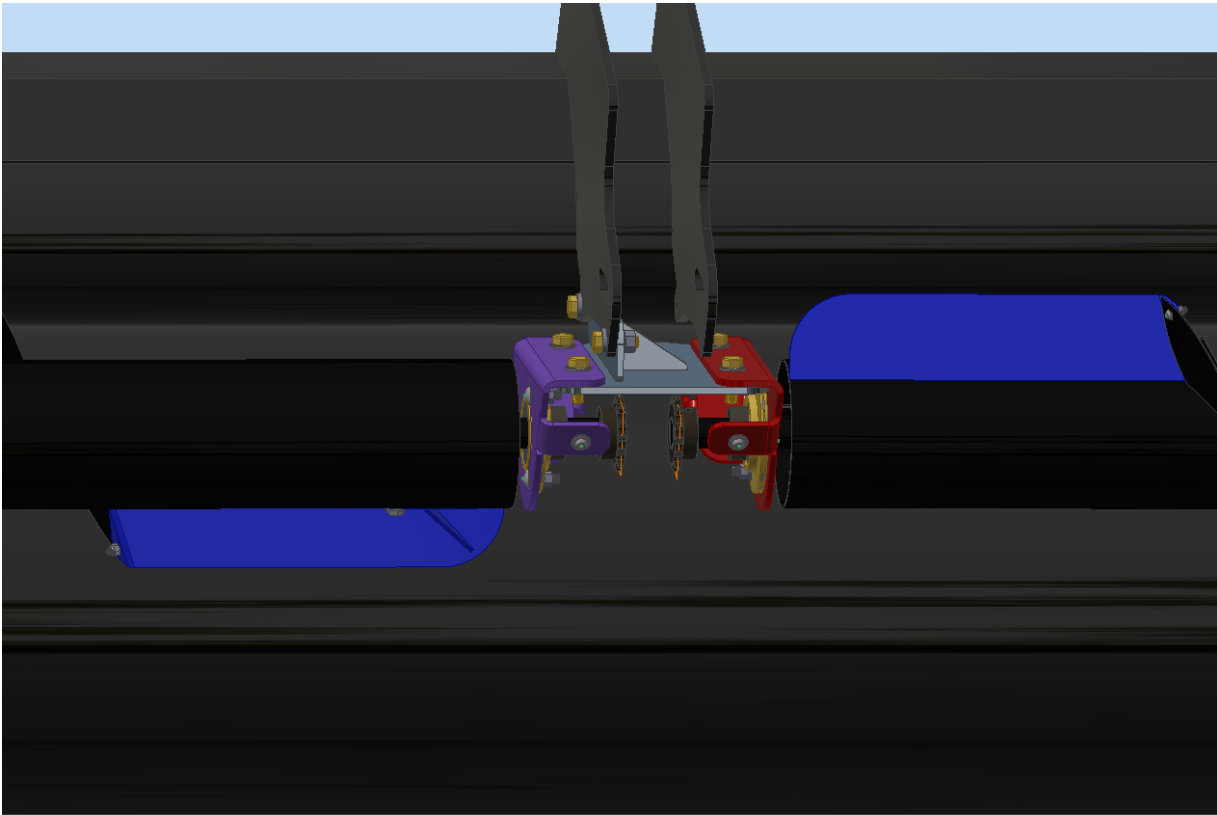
RH AUGER MOUNTED ON CENTER MOUNT FRONT VIEW
